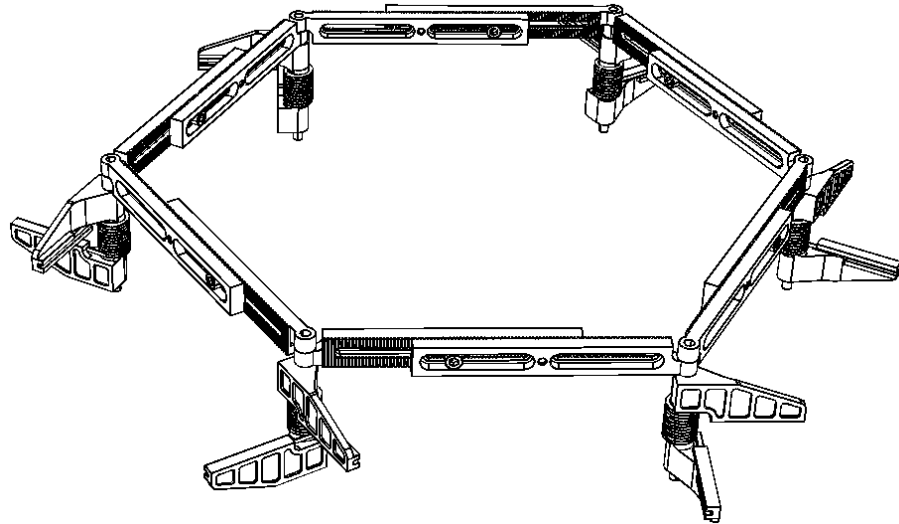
Torsion spring fixture with serrated and slotted expandable links and springs mounted at the corner of connecting links
